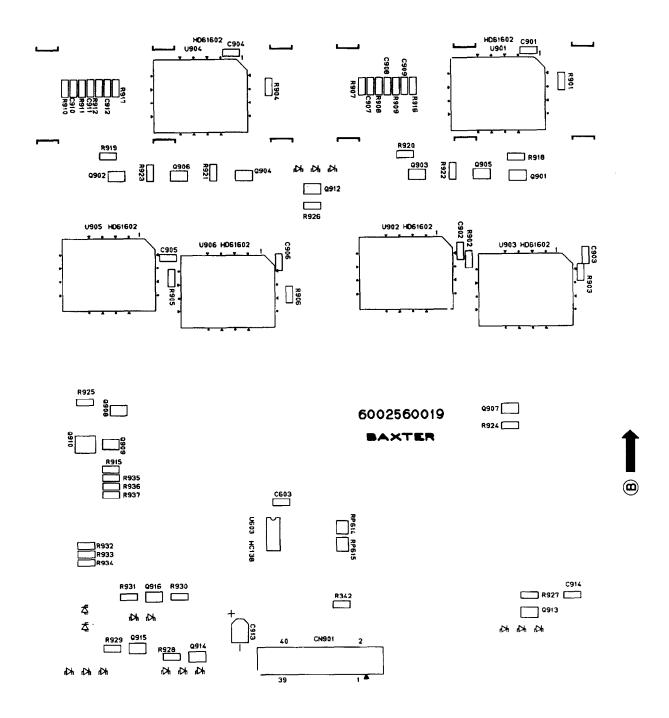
(Sheet 2 of 2). Display PCB - Solder Side
